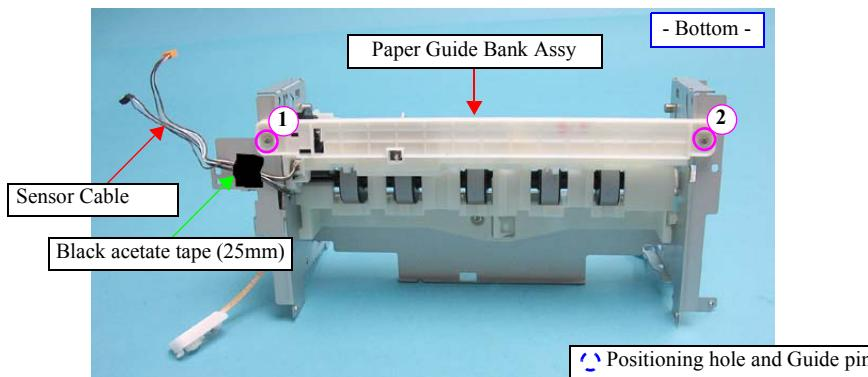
Removing the Paper Guide Bank Assy (1)
